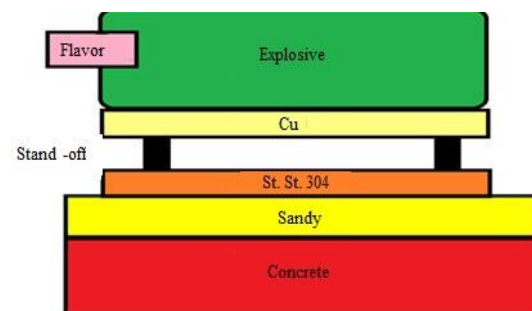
the initial configuration of the plates for for explosive welding [14].
